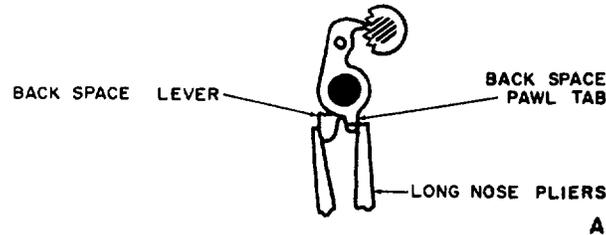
Back space mechanism alignment adjustment (TT-76/GGC).
